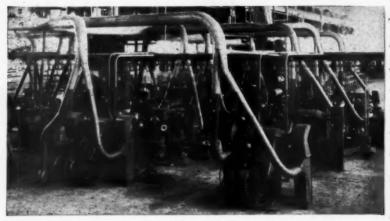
A Canadian installation which removes foreign matter and conserves heat.
